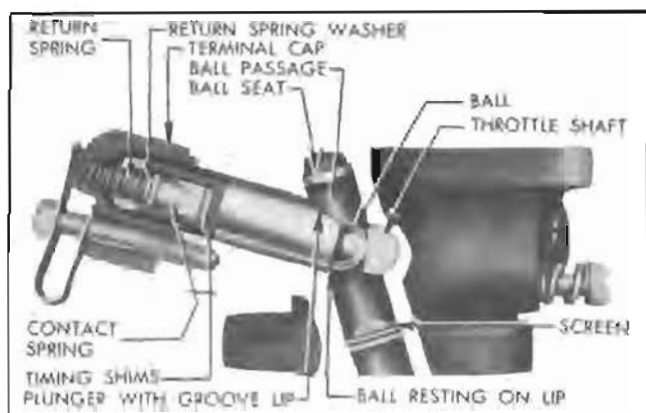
Carter Accelerator Vacuum Switch Correctly Assembled
